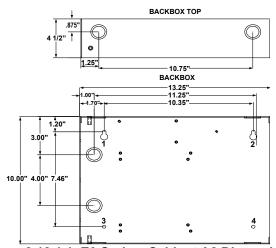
E3 Series, Cabinet A2 Dimensions
